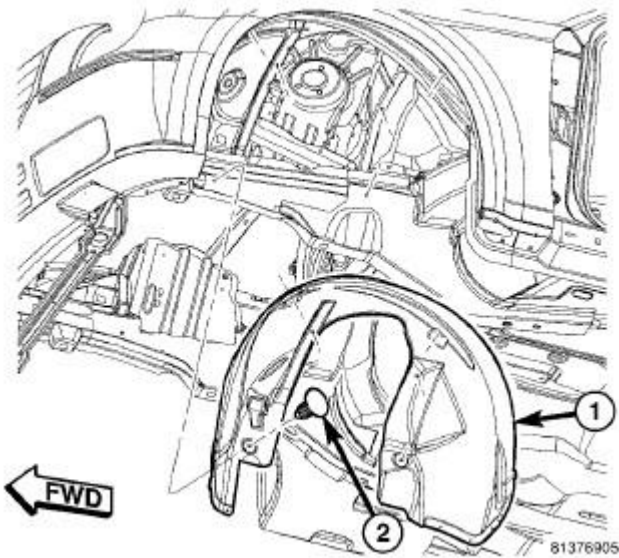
Removing/Installing Front Wheelhouse Splash Shield
